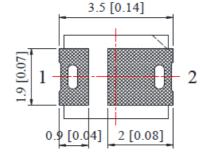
IN-P23CTKUW.70.30 Solder Pattern
